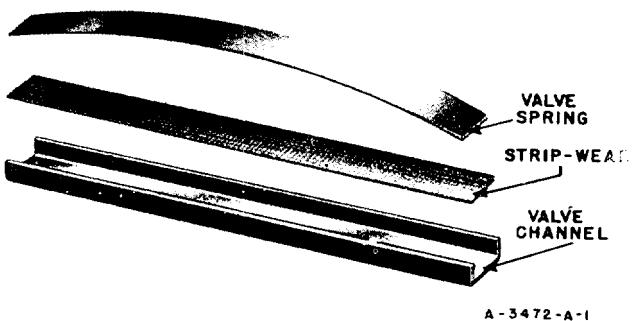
RN-3—Channel, Wear Strip, and Spring for Type "A" NL Rectangular Channel Valve.
